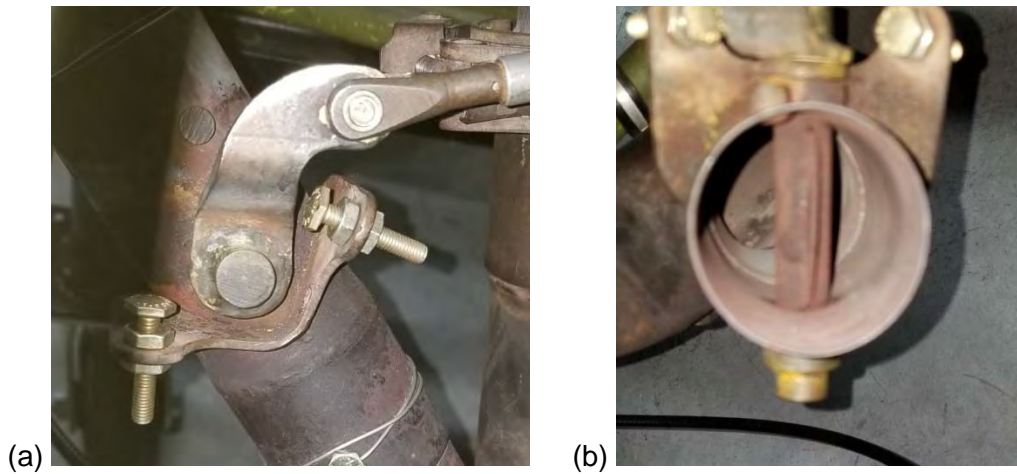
(a) Clearance between the arm and the stop; (b) Open position
